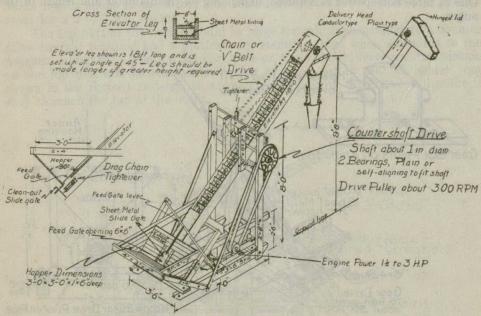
Portable grain elevator, drag or flight type. On skids; head driven; hopper supported on frame.
